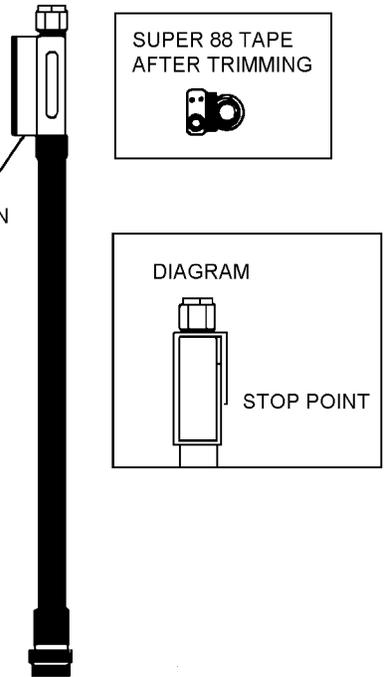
Regulator to Survival Kit Hose Assembly Taping
